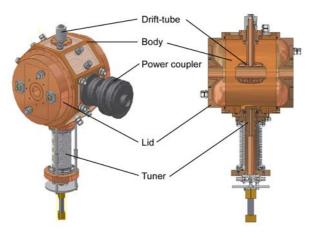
3D view (left) and cross-section (right) of the buncher including coupler and tuning system.
